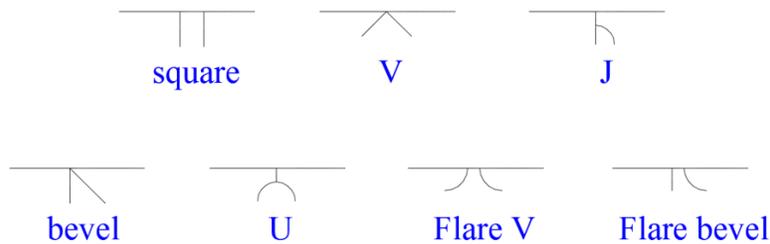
Basic groove weld symbols (arrow side shown)
